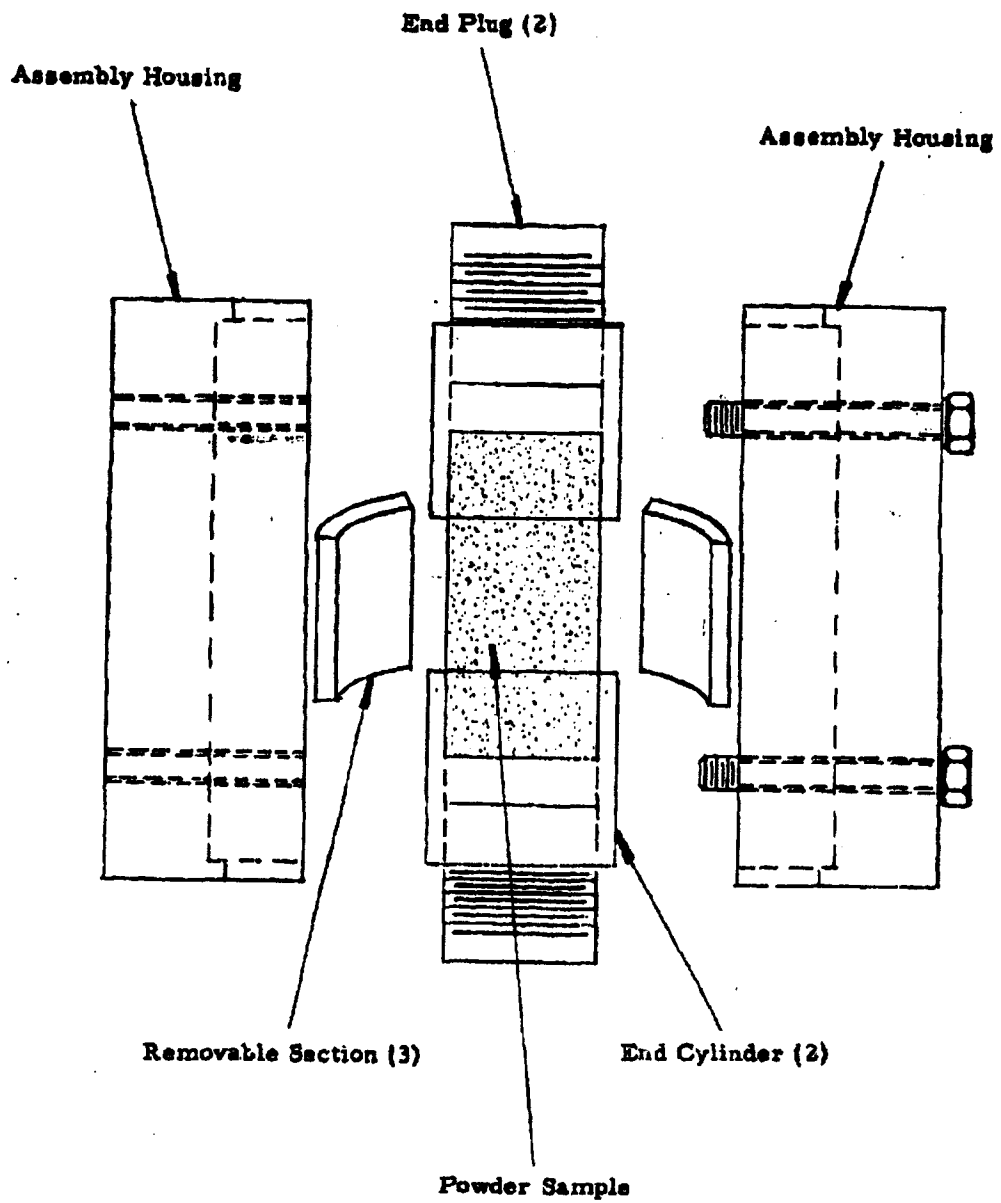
Exploded View of Triaxial Test Sample Preparation Assembly
